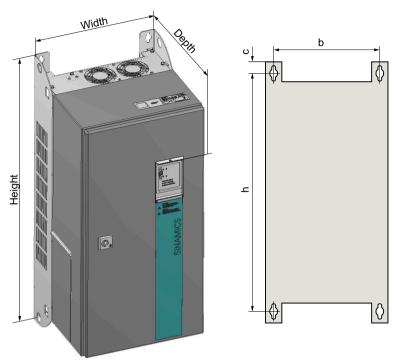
Dimension drawing, PM230 Power Module IP55 FSD ... FSF
